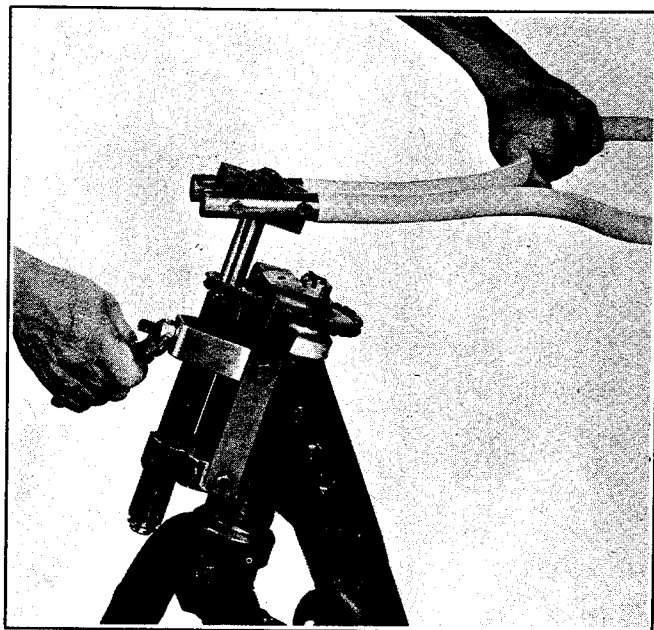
Adjusting Tiller Chain (1973 & Earlier) (Fork Housing Removed)
